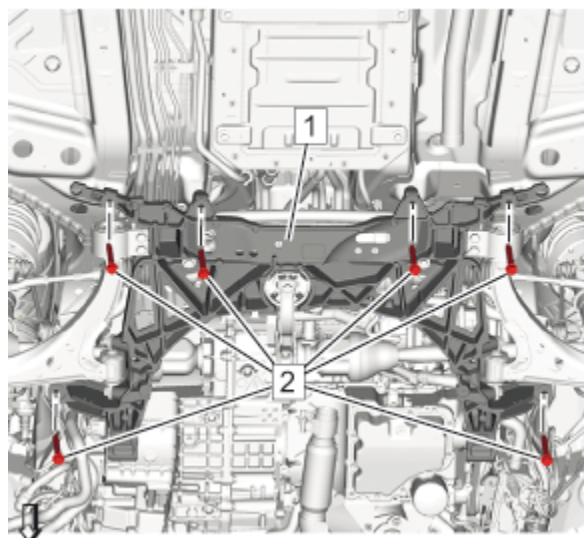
Drivetrain And Front Suspension Cradle Bolts
